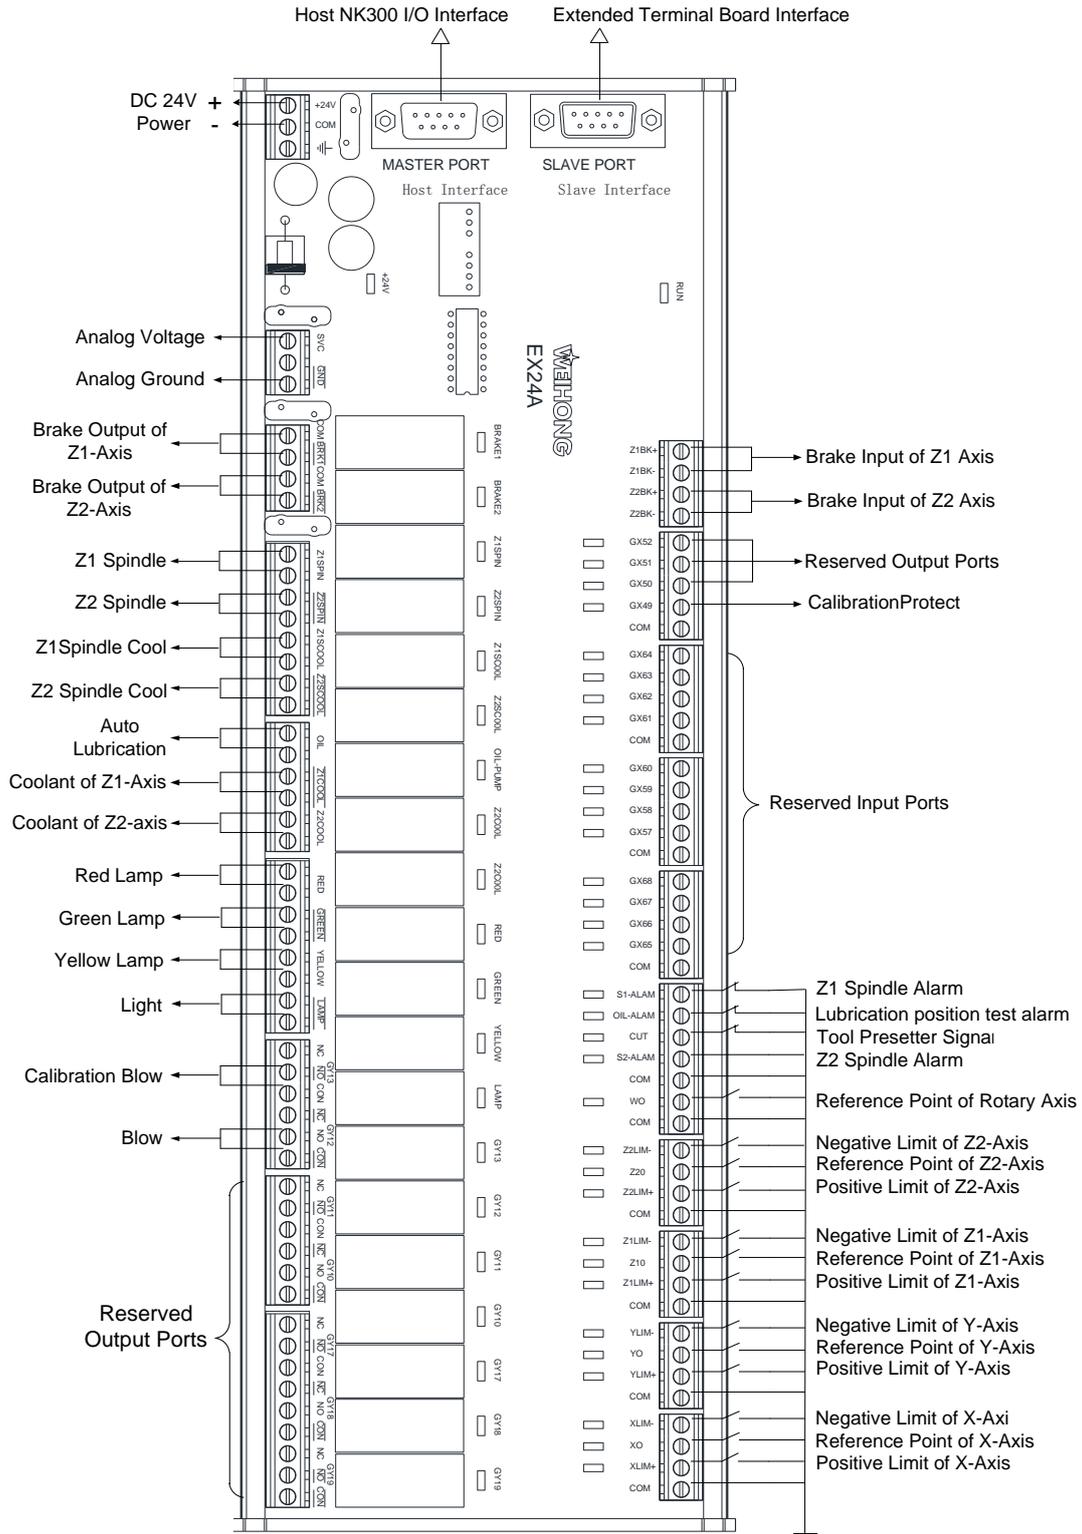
Wiring Diagram of Terminal Board EX24A in Double Z Axis Configuration
